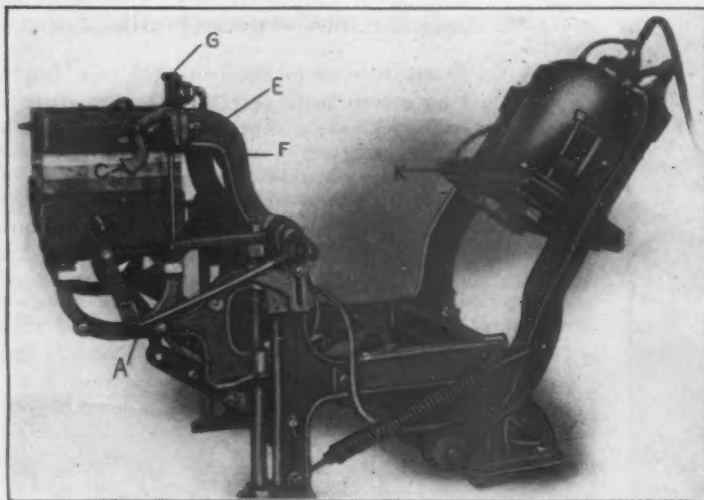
The Machine with the Ramming Head Swung Back and the Cradle Rolled Over.
